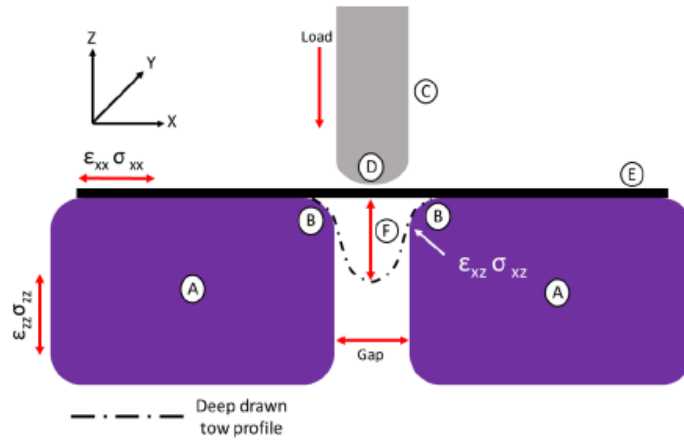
Forming fixture test design concept (A) forming blocks, (B) forming blocks radius of curvature, (C) forming tool (“plunger”), (D) forming tool radius of curvature, (E) sample and (F) deep drawing depth [14, 21]
